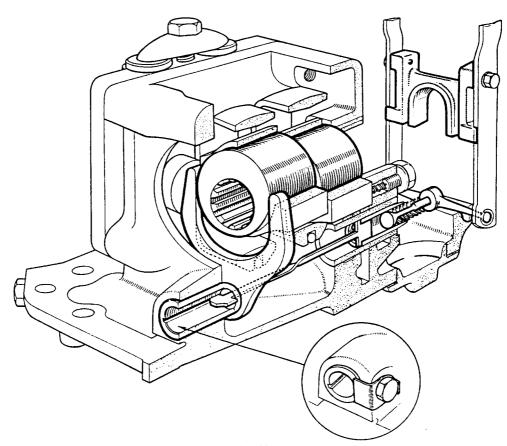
PUMP SHOWING OSCILLATING CONTROL VALVE WITH DRIVE STRIP
